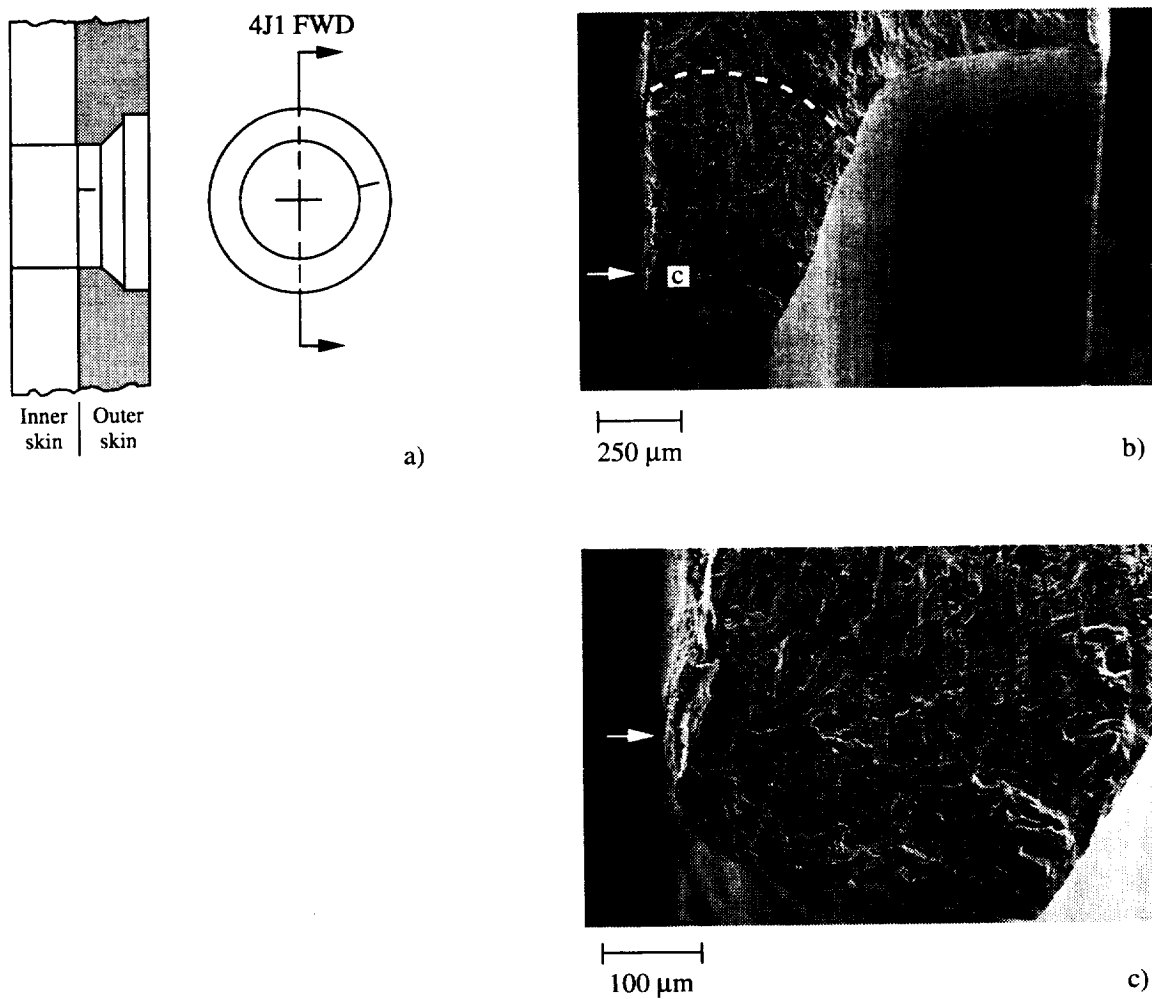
a) The schematic shows the rivet hole 4J1 configuration and the location of the outer skin fatigue crack oriented in the forward direction and above the 3 o'clock position. b) The SEM micrograph shows the fatigue crack fracture surface located at the rivet hole shank region. The arrow marks the likely crack initiation region along the faying surface and the dashed line marks the fatigue crack front. c) The SEM micrograph shows the fatigue crack fracture surface at region "c" in Figure 11.9.b. The arrow marks the likely crack initiation region along the faying surface.
